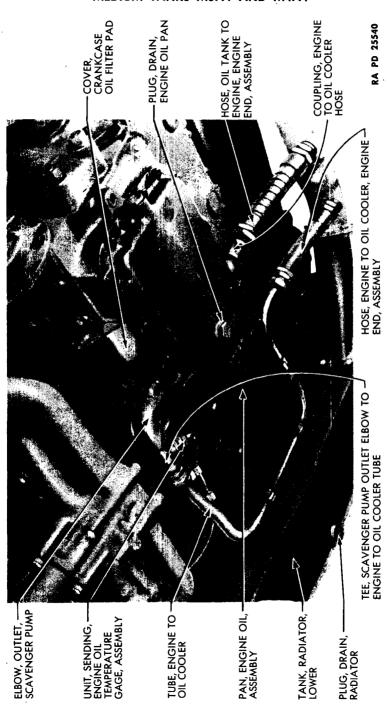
Power Unit Oil Tubes, Bottom And Left Side
